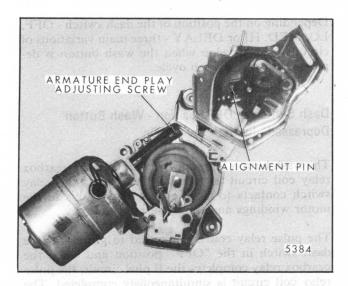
Installing Pump to Motor housing and remove locator pin, temporarily connect wiring connector.
